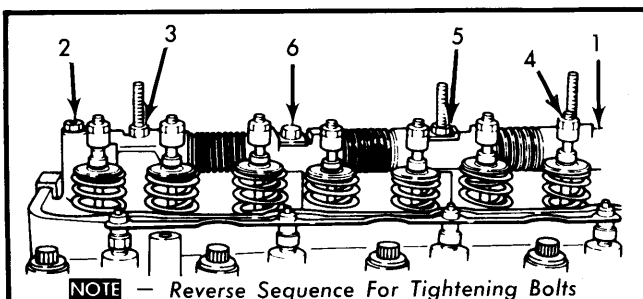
Rocker Arm Bracket Bolt Loosening Sequence
